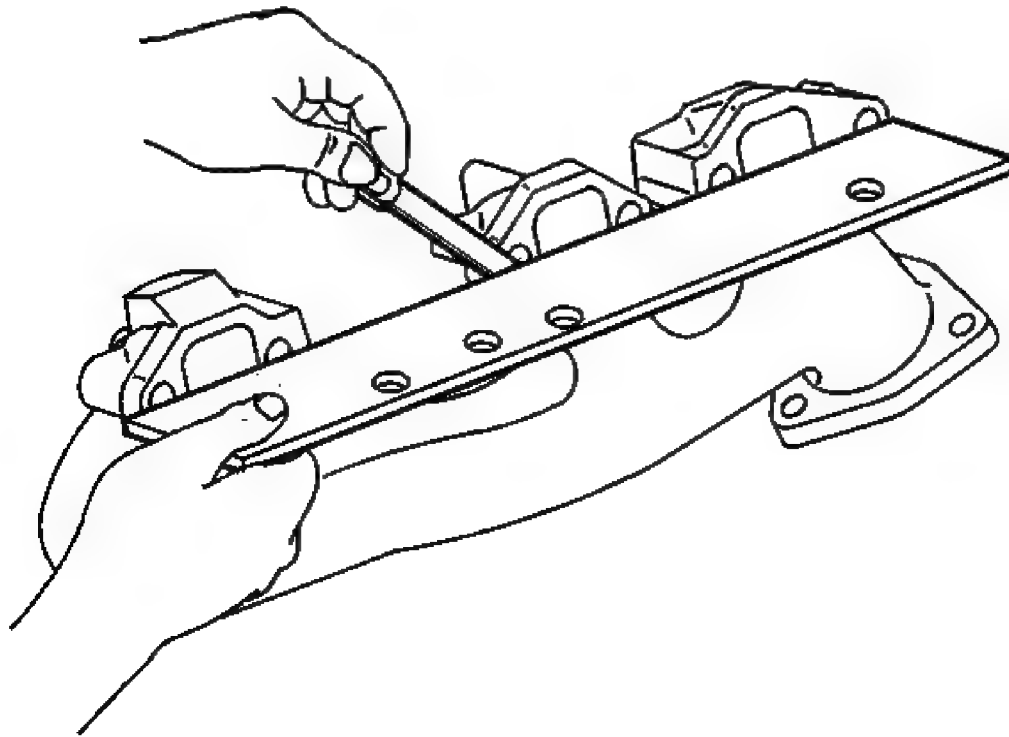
Measuring Alignment Or Surface Flatness Of Exhaust Manifold Flanges
